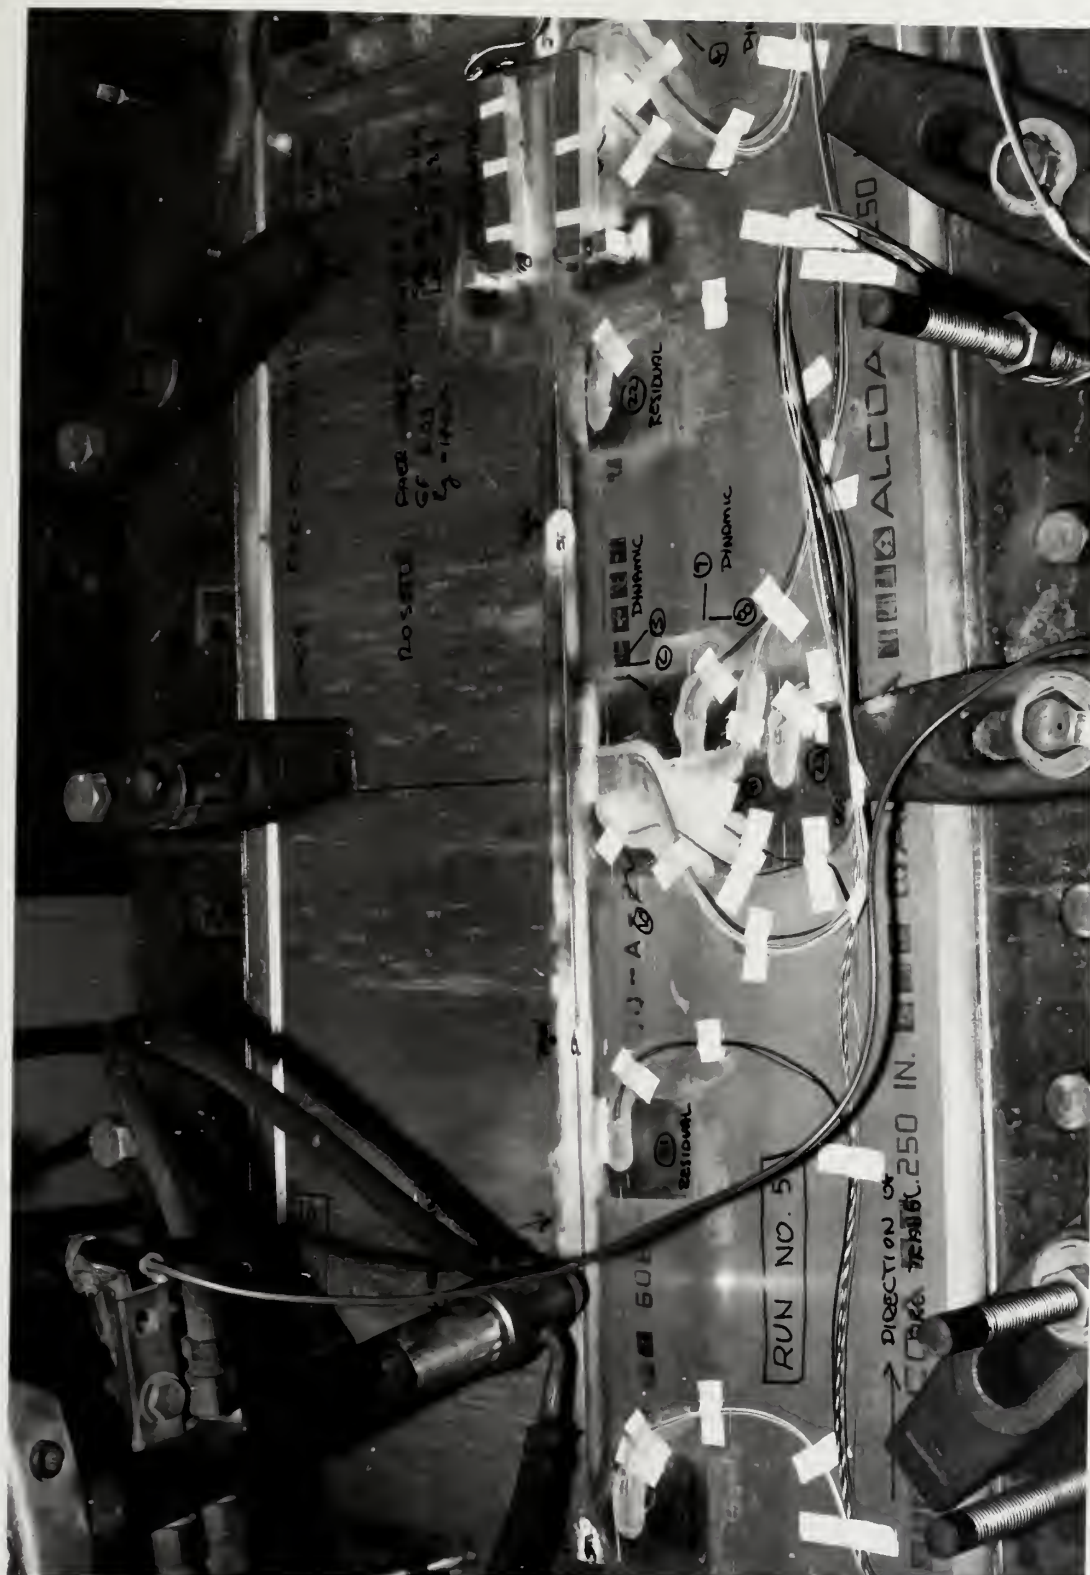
Plate Instrumented and Clamped Under Welding Torch.
